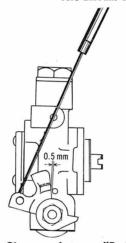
Clearance between "Posi-Force" control lever on pump and stop should be 0.5MM (0.019 inch) as shown with throttle fully open.
